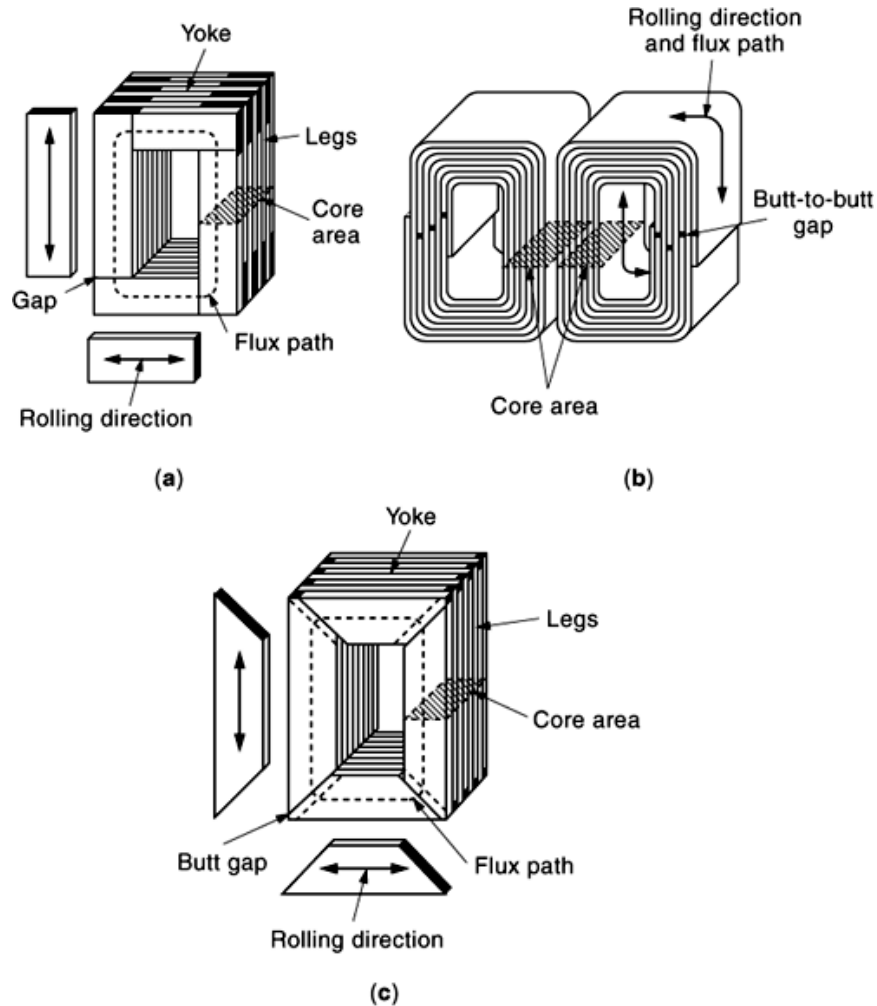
Typical iron-core assemblies for either shell-form or core-form transformers: (a) butt, (b) wound, and (c) mitered cores.
